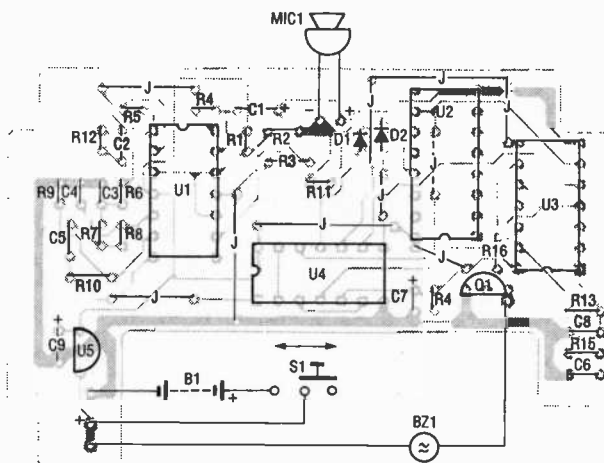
Once you've obtained the board and the parts that will populate it (either on your own or by ordering them from the supplier listed in the Parts List), use this parts-placement diagram to locate and install the components in their proper positions.
